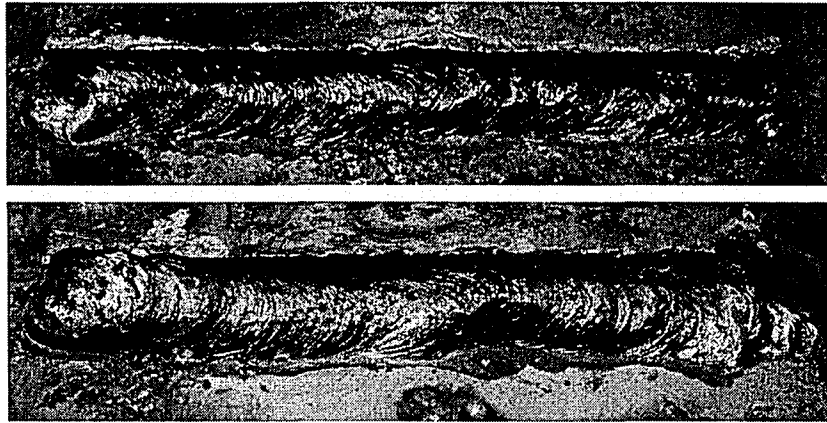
Specimen PC-4—Top Image-Weld 1(Wet), Bottom Image-Weld 2(Wet)
